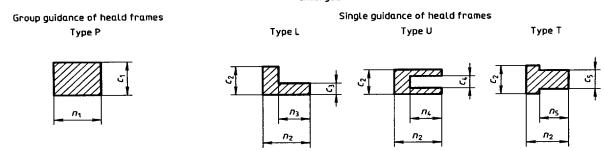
and 2 and table 1 define and specify the dimensions of heald frames on which the heald-carrying rod is fixed directly on the frame stave.
